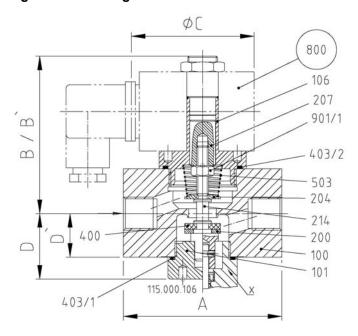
Thread design: 1-EVO 3-10R; 4-EVO 2-7R
